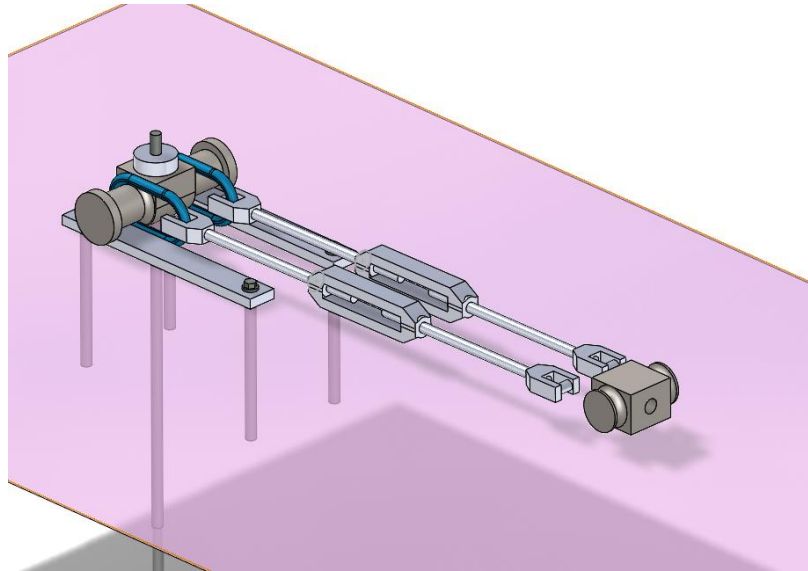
Turnbuckles attached to master links on apparatus chassis
